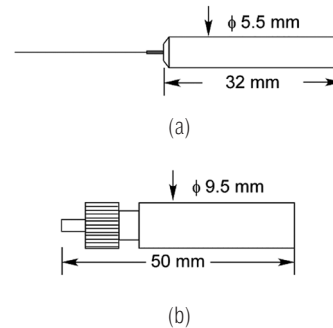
Mechanical dimensions of the Faraday Rotator Mirror.
